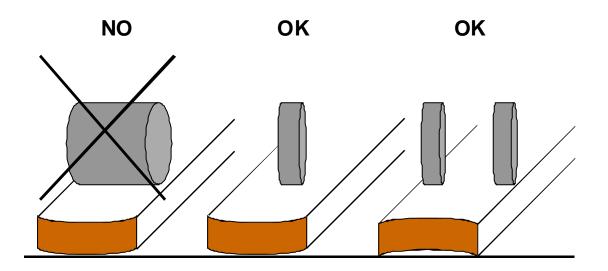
Recommended infeed rollers to avoid cracking of the boards.
